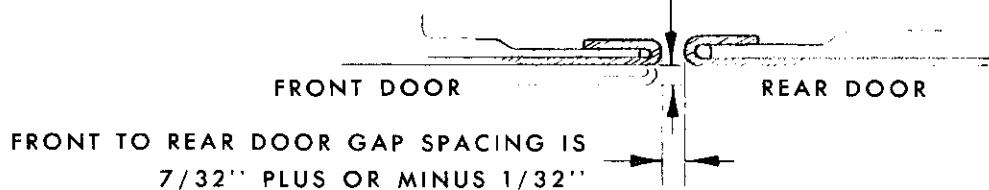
Specified Body Opening Clearance Tolerances - "A" Styles
